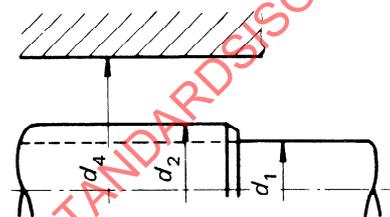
Balanced mechanical seal with or without short sleeve
